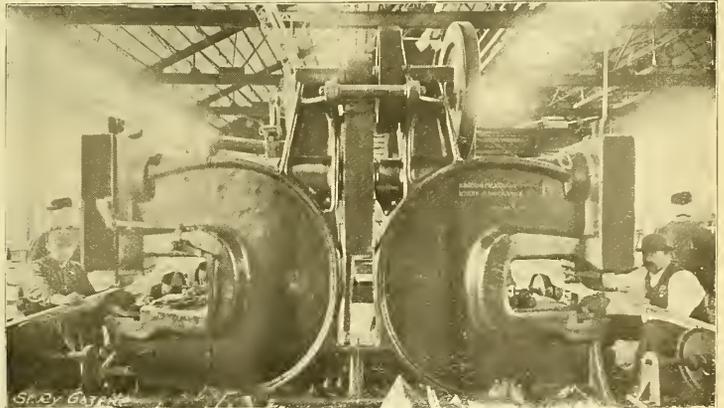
DOUBLE PUNCH—BERLIN IRON BRIDGE WORKS.
